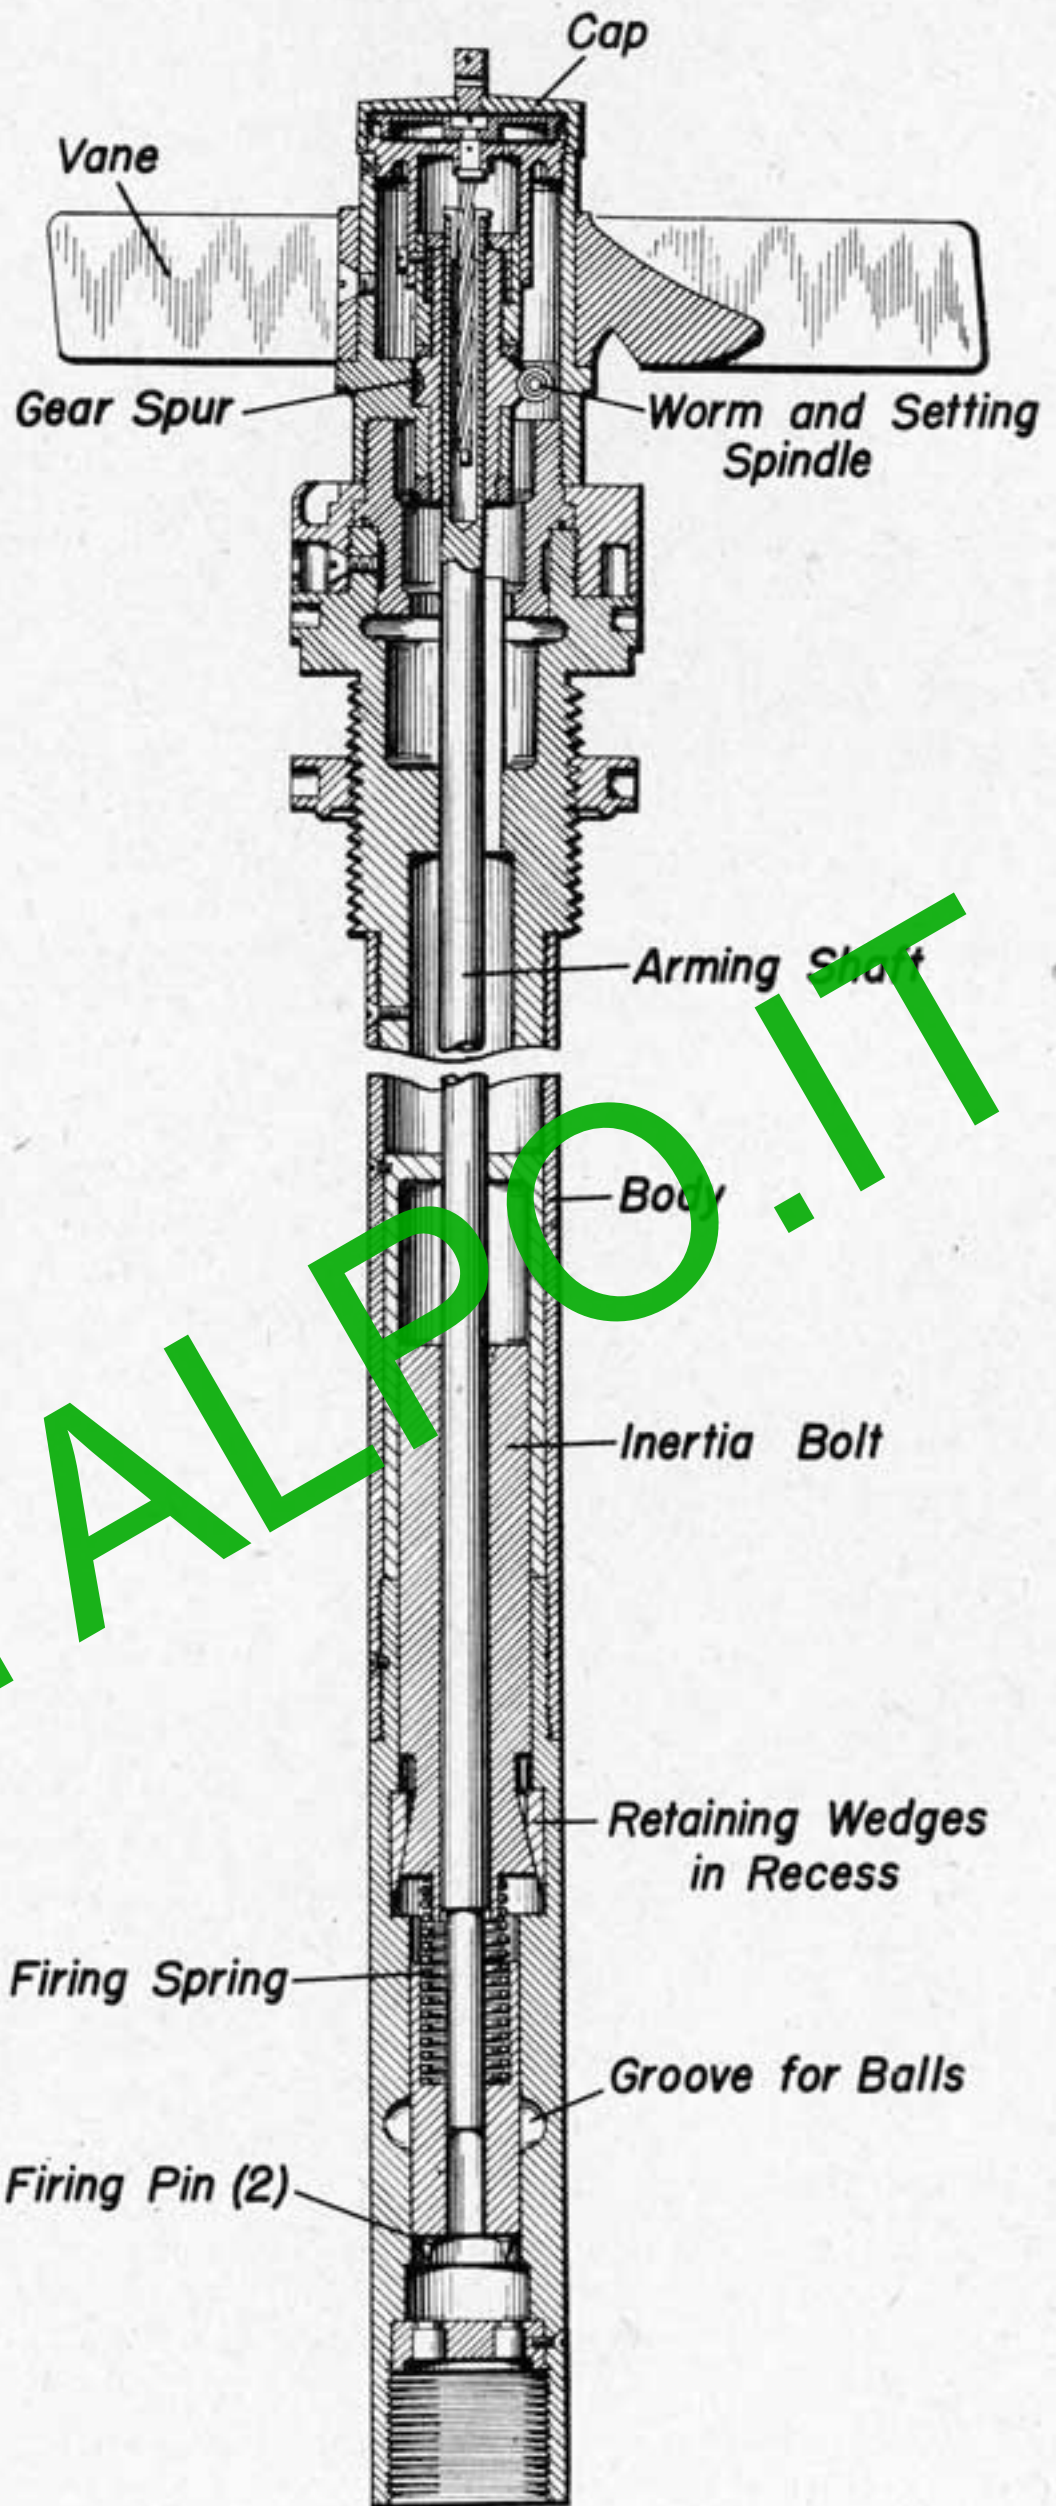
160/C.S. Depth Bomb, Tail Fuze, Armed Position, Sectional View
